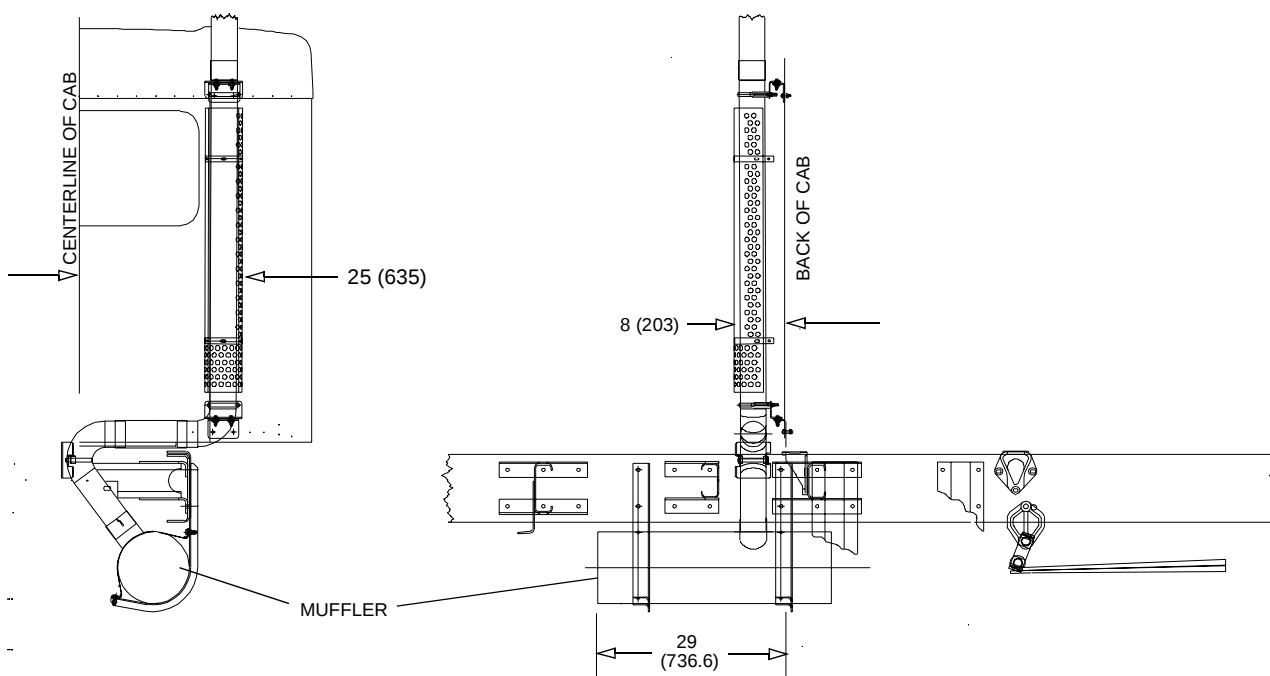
T300 Vertical Tailpipe on Back of Cab [Inches (mm)].
